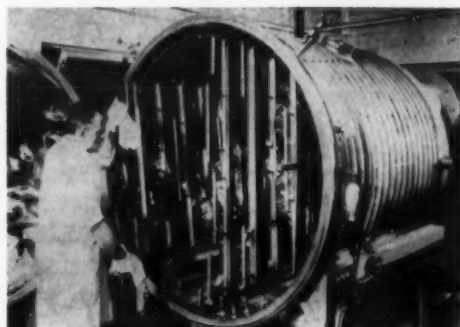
REMOVING RACKS of large, deposited-film beam splitters from 60" coating chamber.
